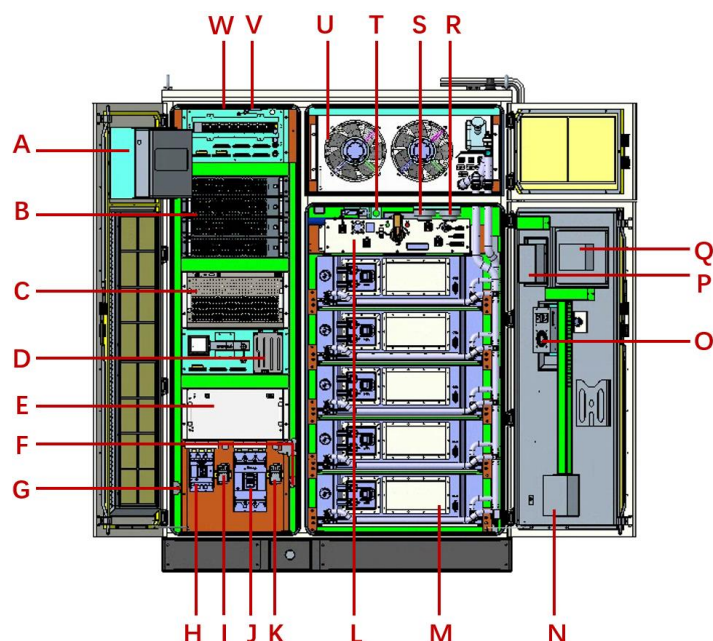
Components inside the cabinet of CESS233-100-01A
